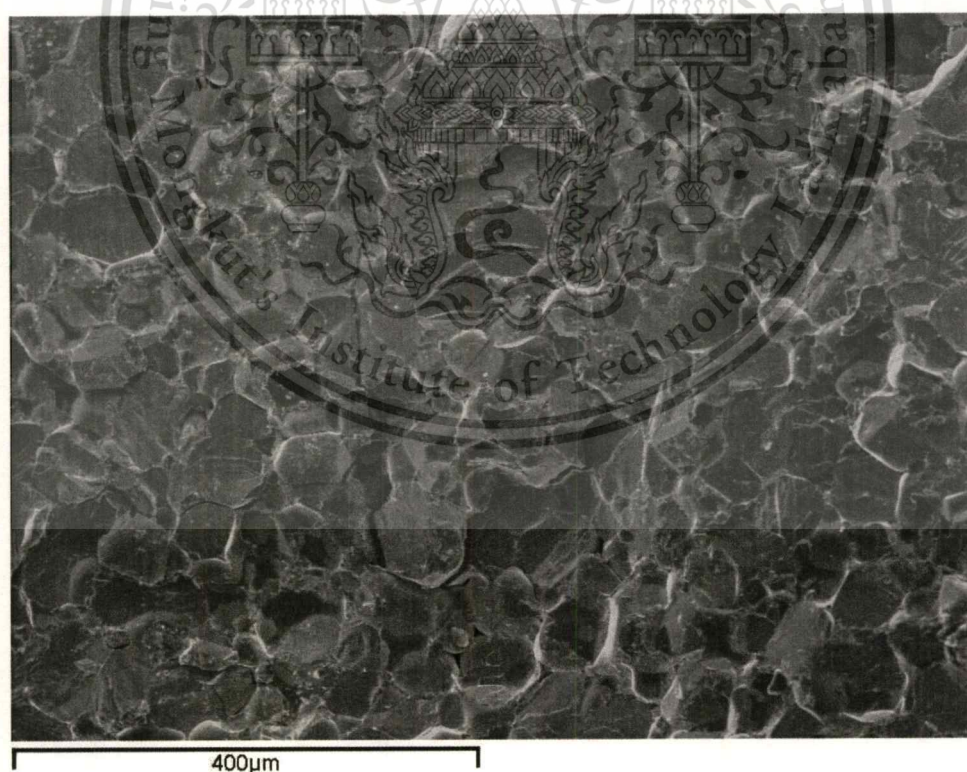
Fracture surface of W-(Ni-Cu-Co) specimens sintered at 1450°C for 8 hours.
